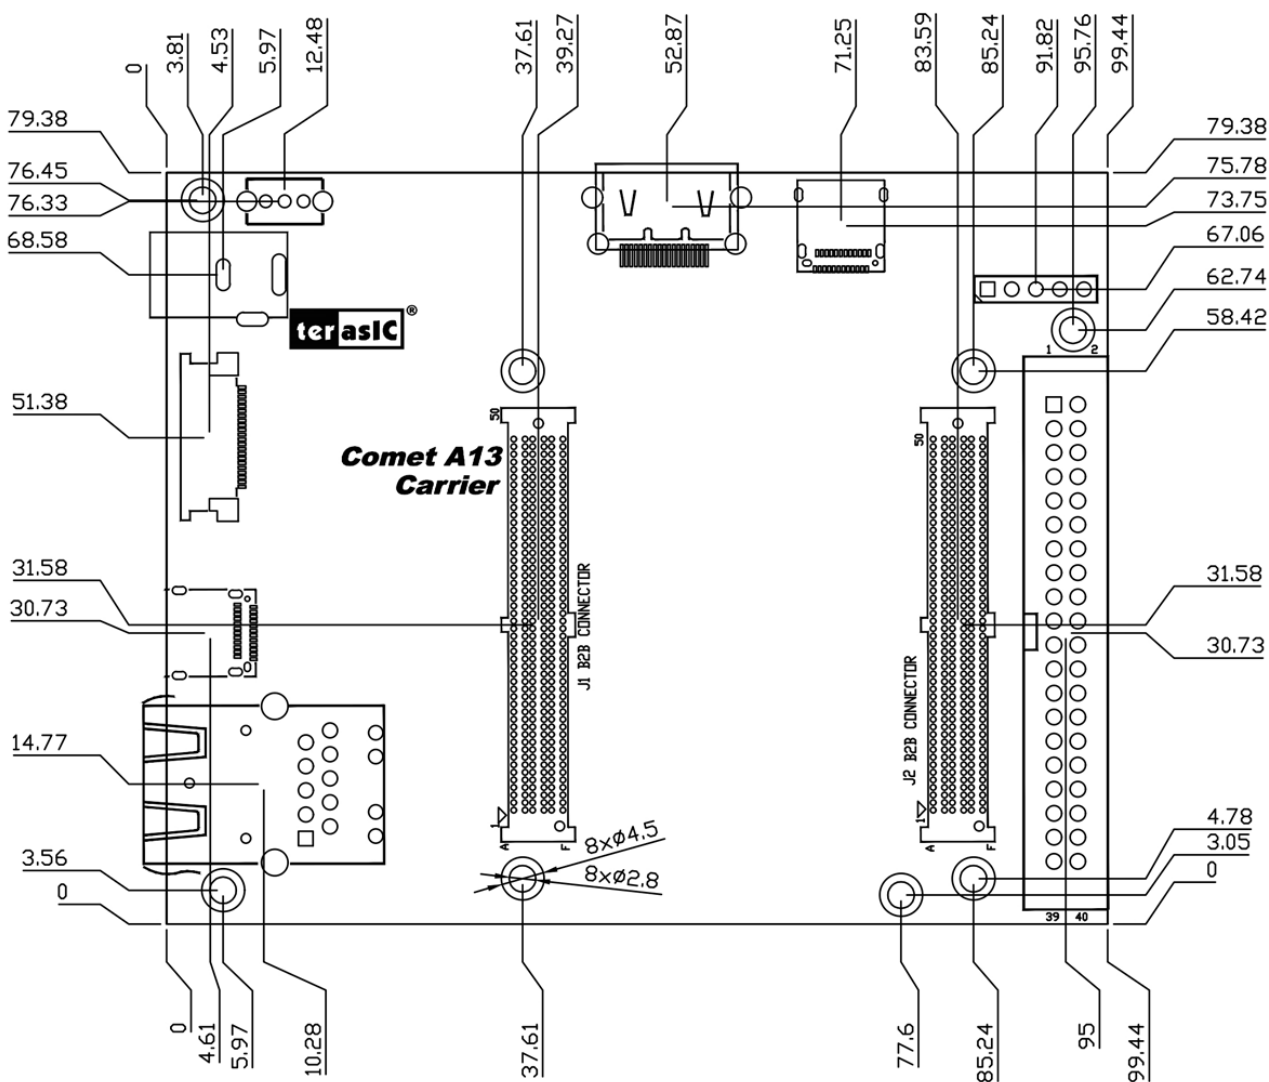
Terasic Carrier Board B2B Connector Layout
